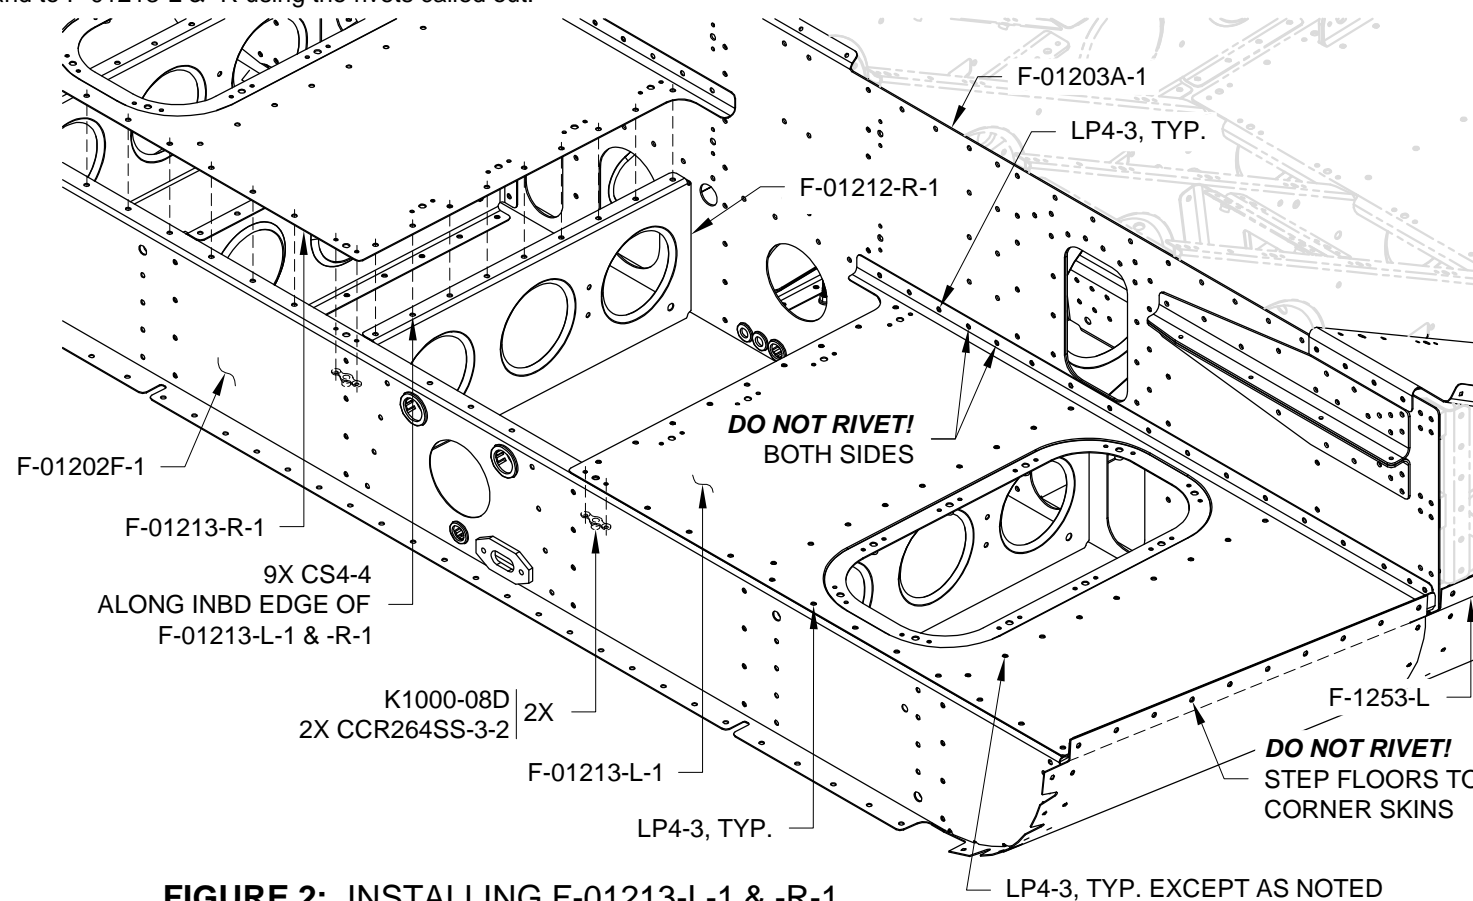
INSTALLING F-01213-L-1 & -R-1
